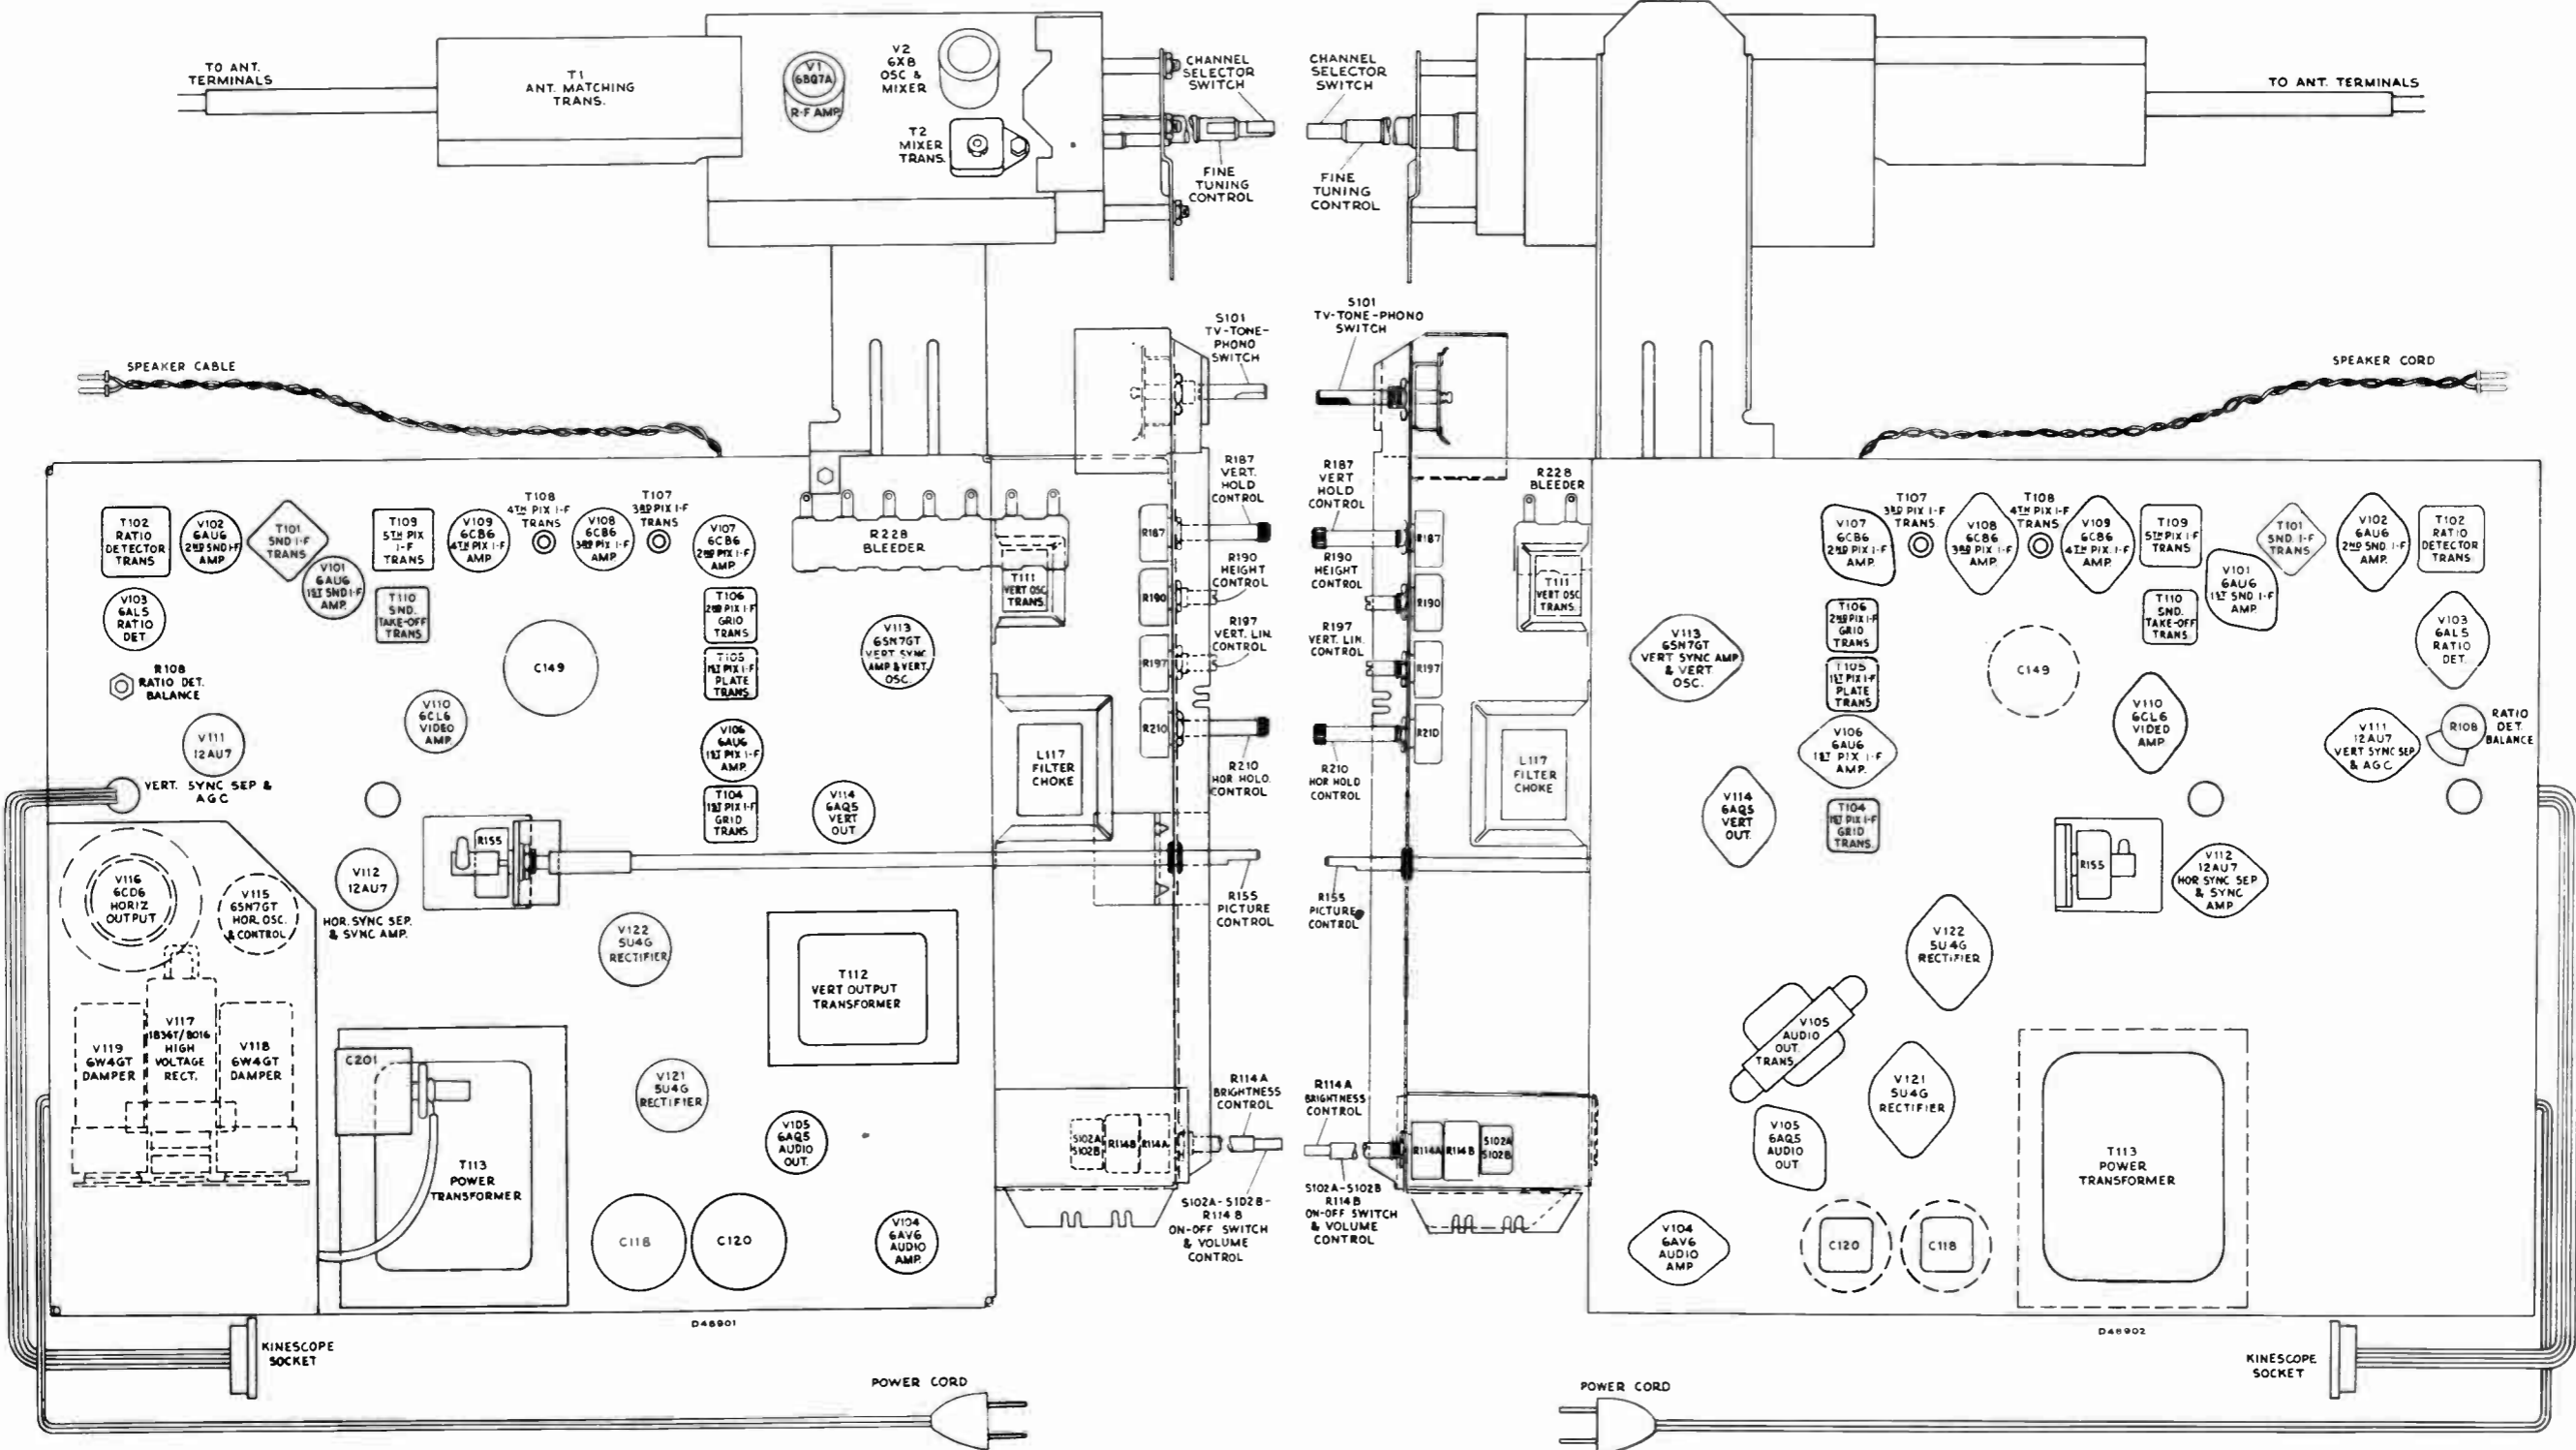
Chassis Top View (shown with KRK29 Tuner)
